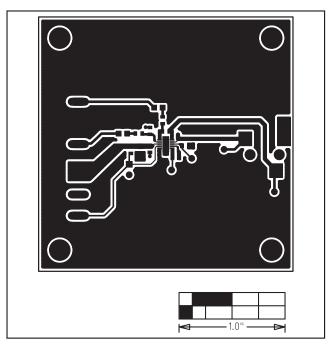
MAX9820 EV Kit PCB Layout—Component Side
